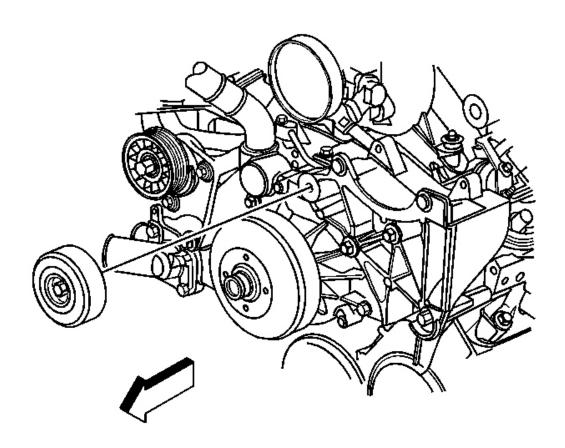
View Of Accessory Drive Belt Idler Pulley Courtesy of GENERAL MOTORS CORP.
